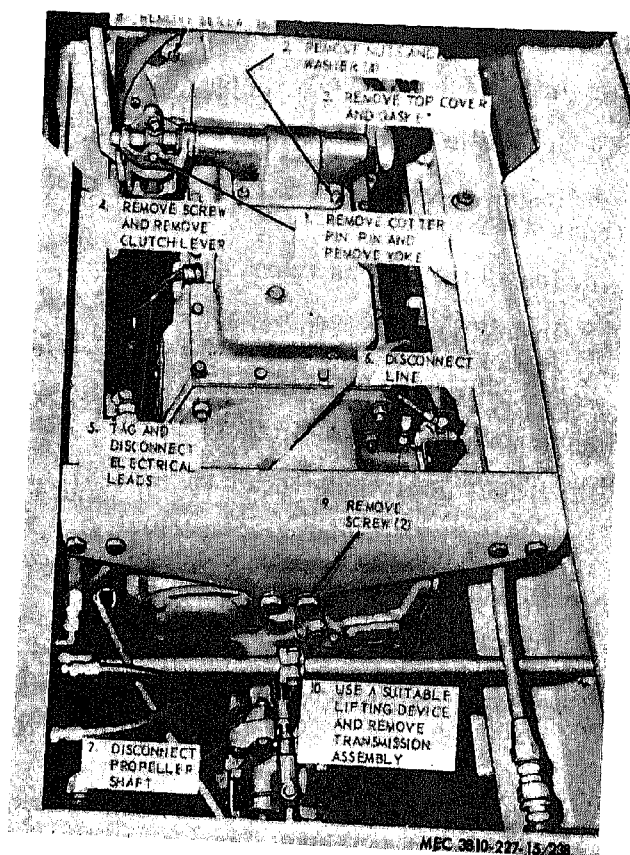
Carrier engine top cover and transmission assembly, removal and installation.
